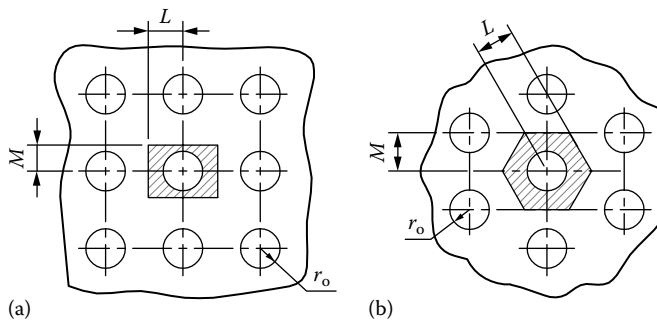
Geometrical details of continuous fin-tube heat exchanger layouts. (a) Rectangular tube array and (b) hexagonal tube array.
